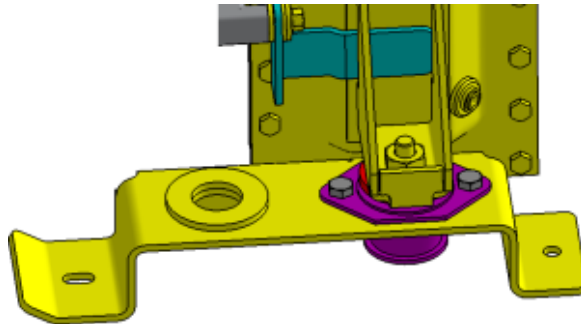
MOUNTING SUPPORT AFTER 180° ROTATION
